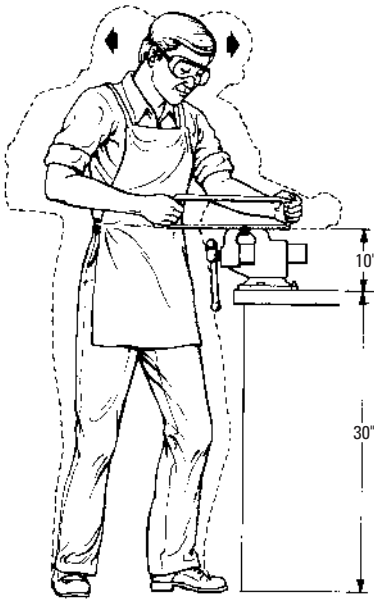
Proper stance for cutting. (Courtesy Disston, Inc.)
